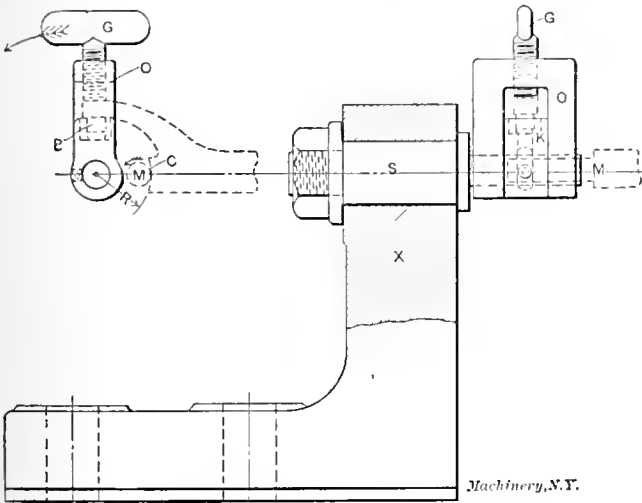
Fixture for Milling Seat for Nut on Wrench.
